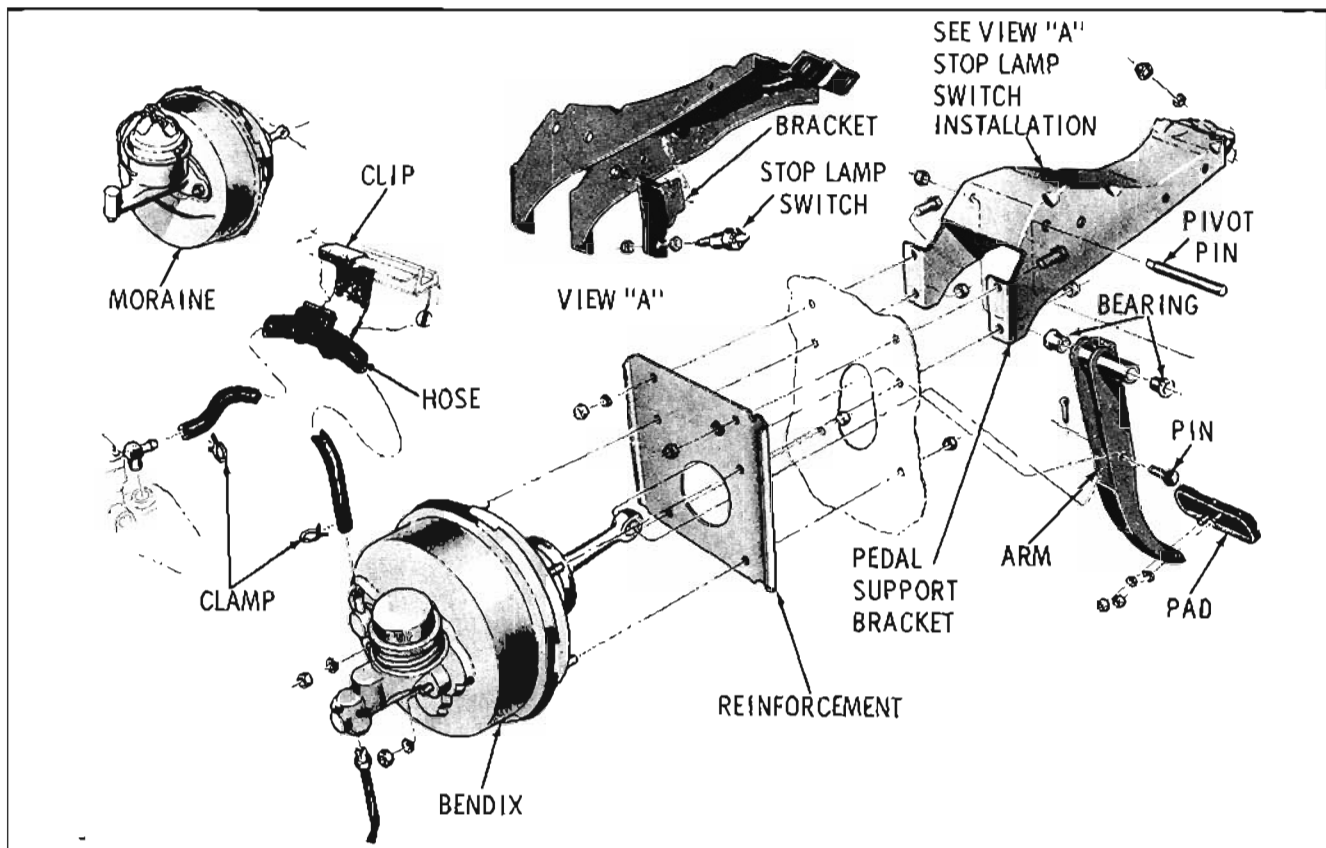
Power Brake Installation (33, 34, 35, 36, 38 & 39 Series)
